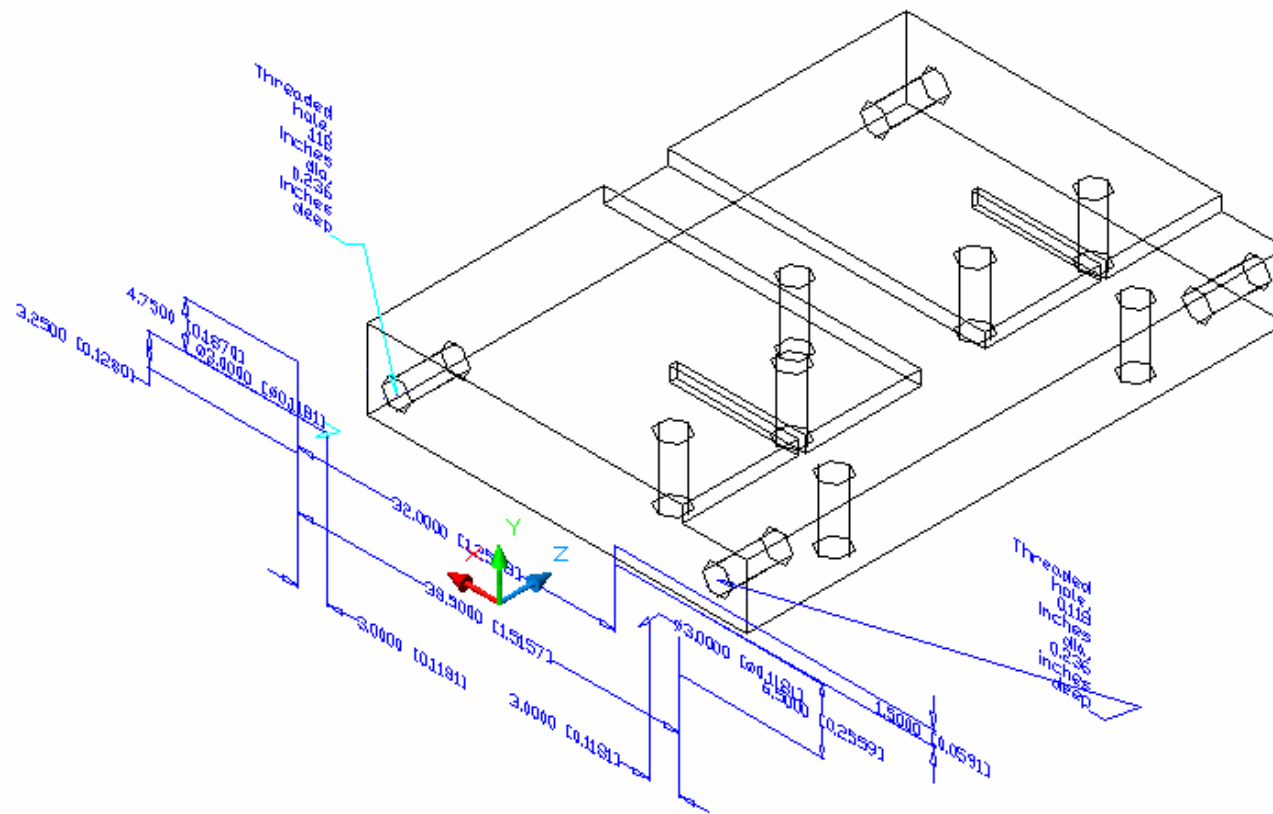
Base plate 3-D wire view showing position of grooves and notch
